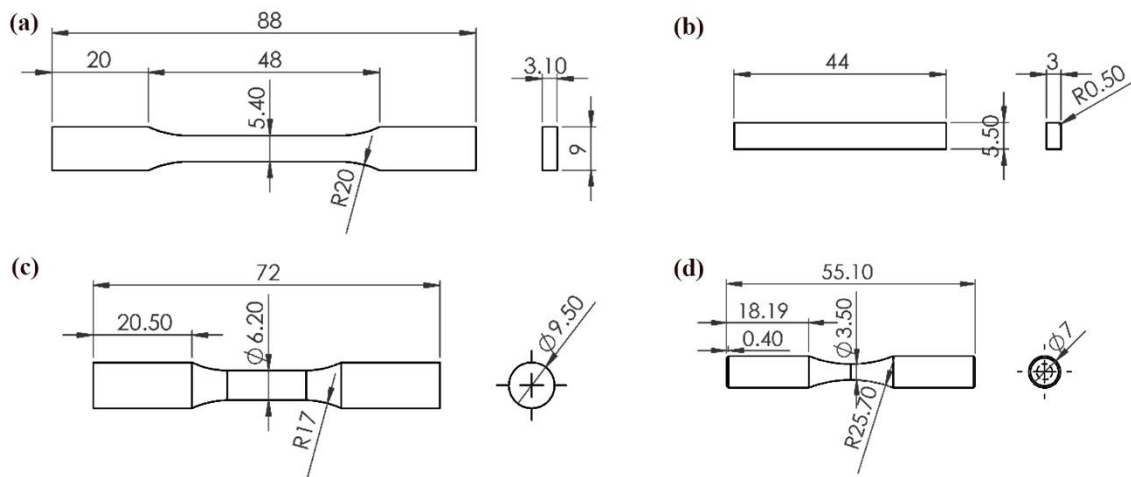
Dimension in mm of MIMed specimens utilized for fatigue testing of (a) uniaxial fatigue, (b) four-point bending fatigue, (c) and (d) rotating bending fatigue.
